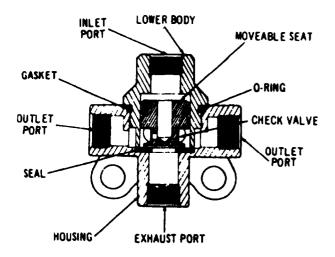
C-7. Exhaust & Pressure Retaining Valve (36Z221)
